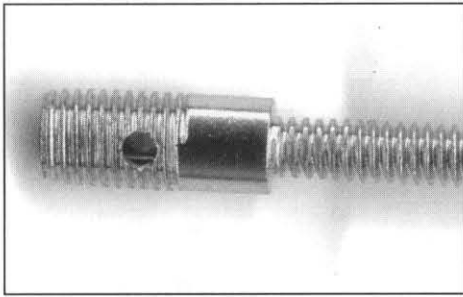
A hole drilled through the binding post lets you hold it with a small hex wrench while tightening the nut.
